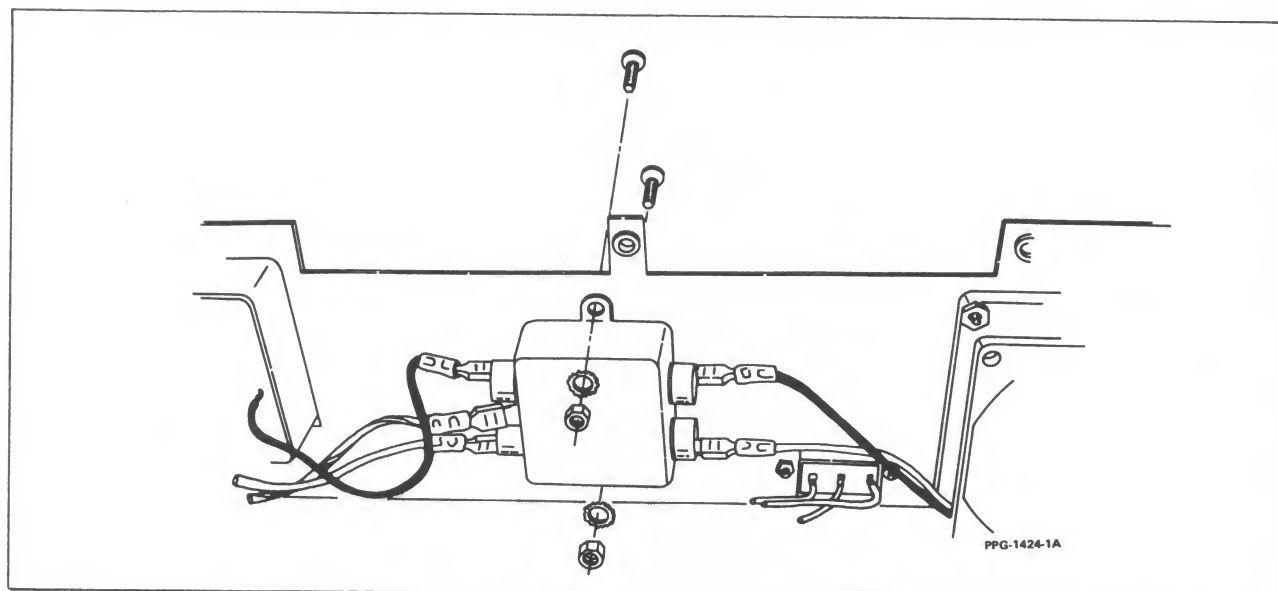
Tape Cartridge Drive Enclosure Line Filter Assembly
